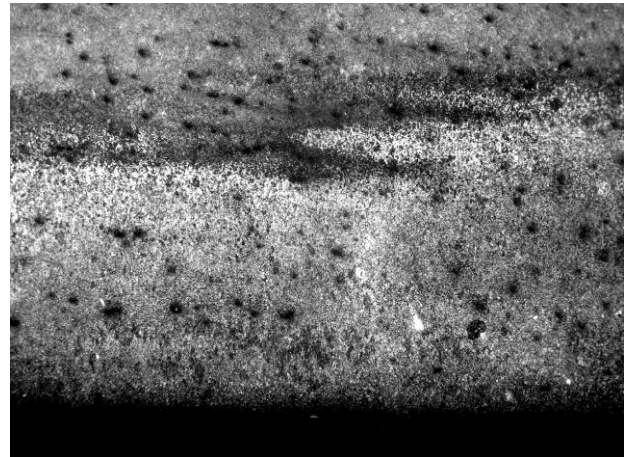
The lower finish die with the trace of intensive abrasive wear after forging of 300 parts.
